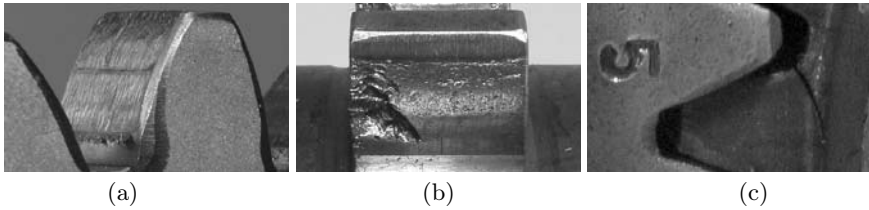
Defects in gears: (a) scoring, (b) breaking of gear, (c) pitting
